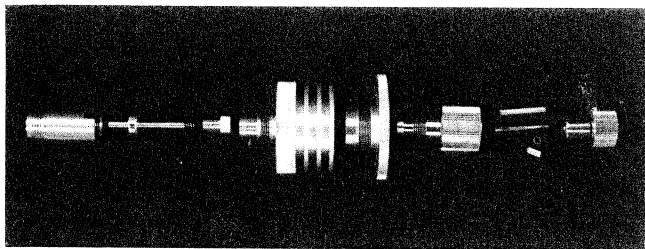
Photograph of Tunable Coaxial Oscillator of Fig. 23, Disassembled.
